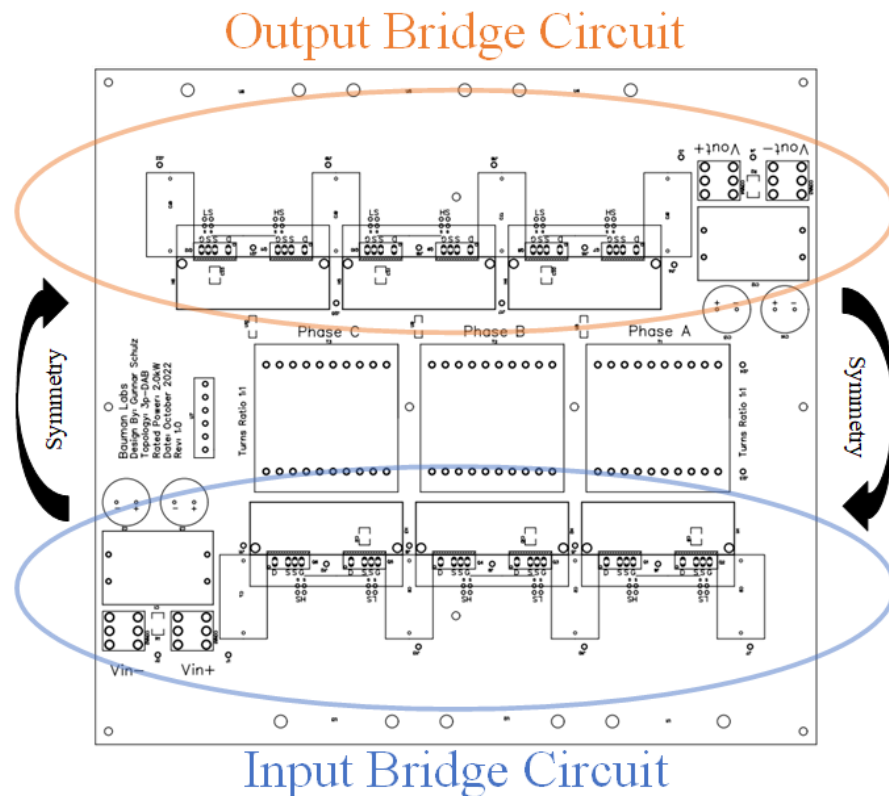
Symmetrical layout of components on 3p-DAB prototype PCB.
